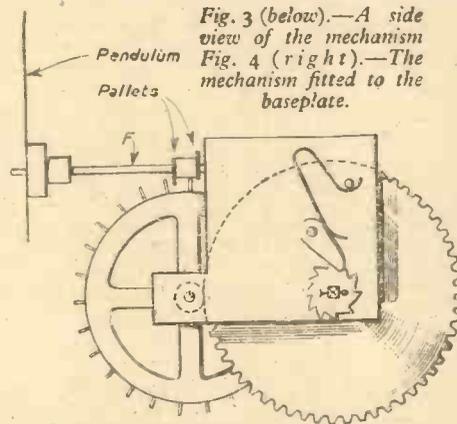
(below).—A side view of the mechanism. Fig. 4 (right).—The mechanism fitted to the baseplate.
